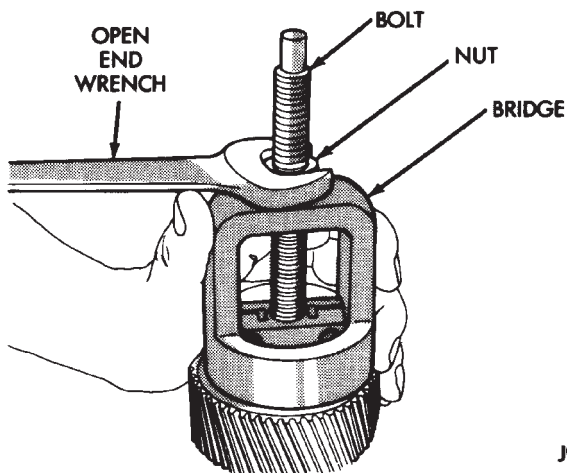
Puller Bolt And Jaws Seated Under Needle Bearing
